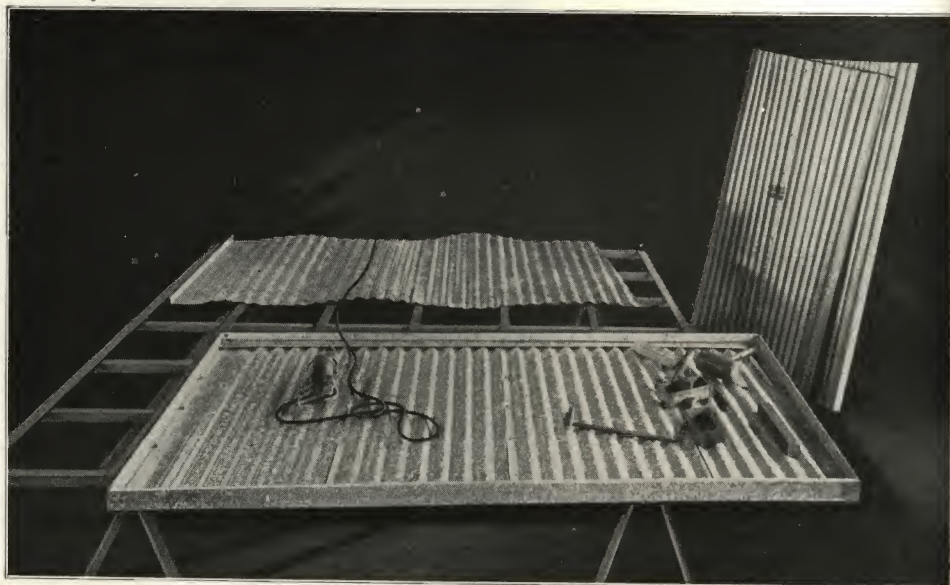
"FyeR-Wall" Corrugated Steel Doors in process of construction, showing practically completed door in foreground; steel corrugated back in left background; two steel corrugated front faces in right background.
